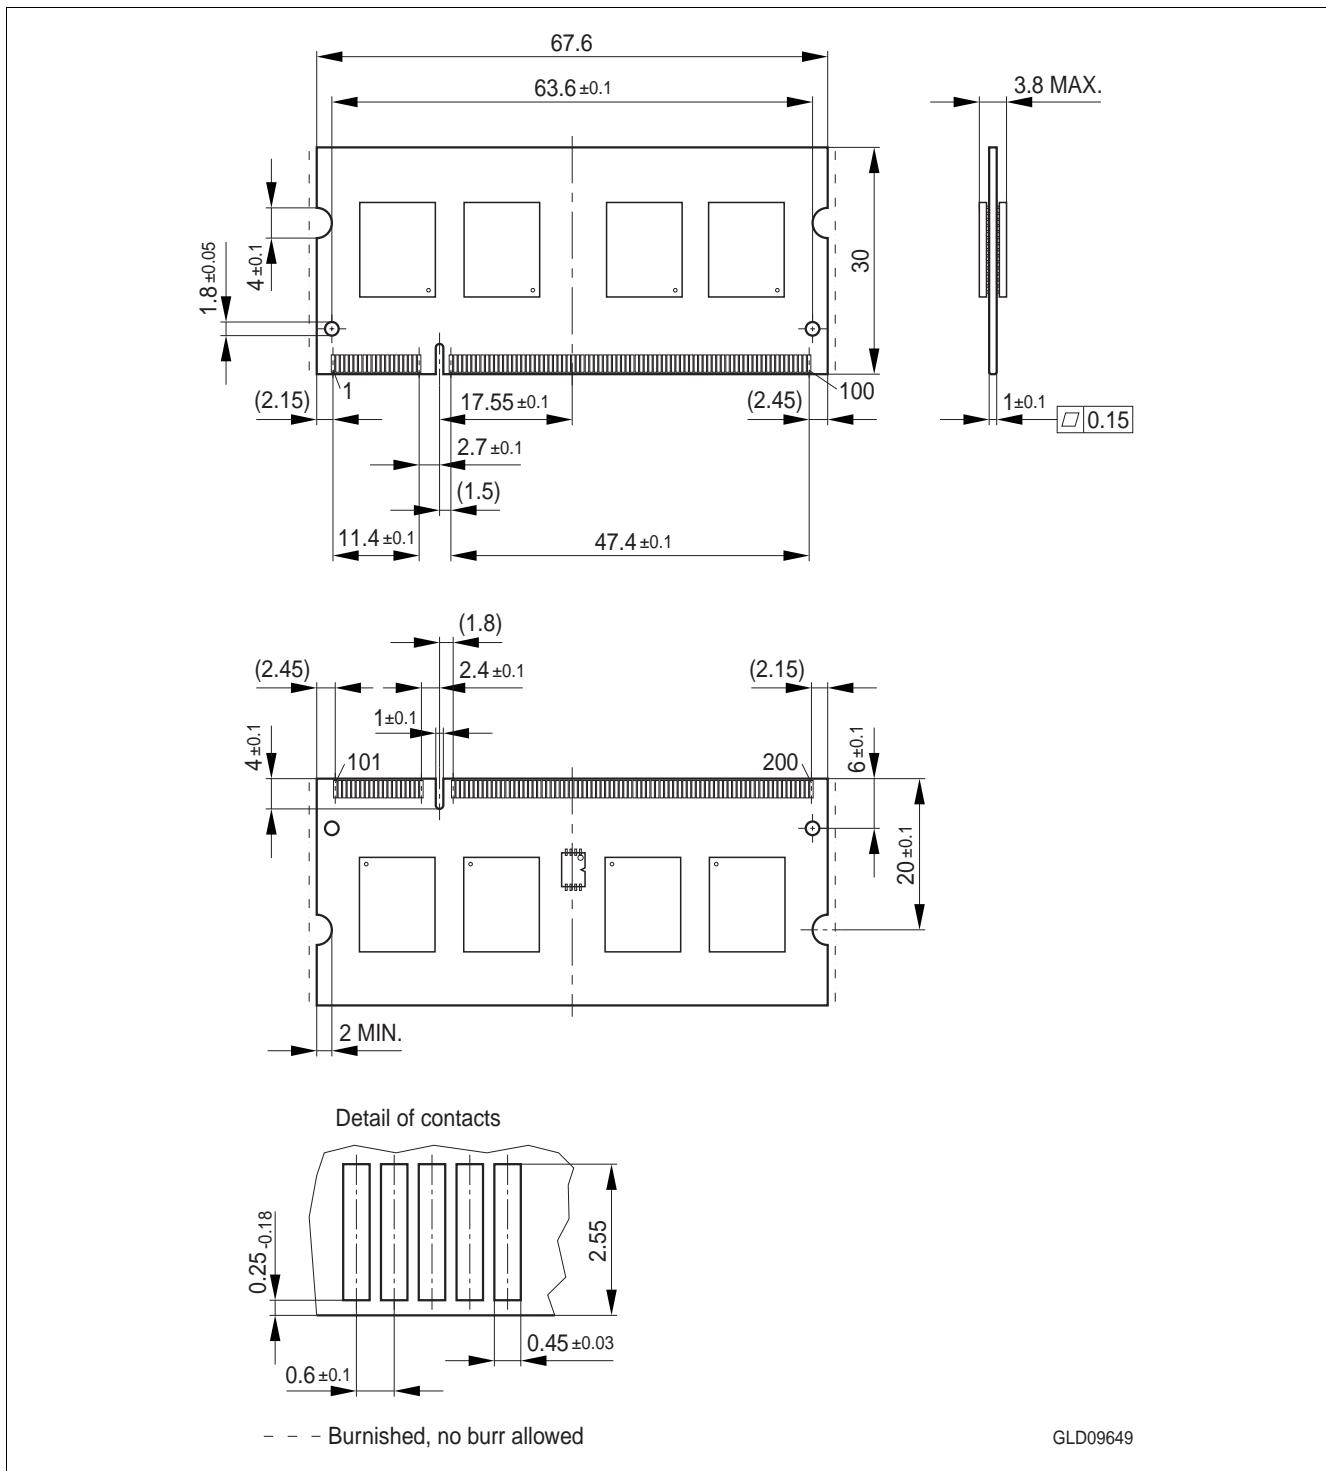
Package Outline Raw Card A – L-DIM-200-31
